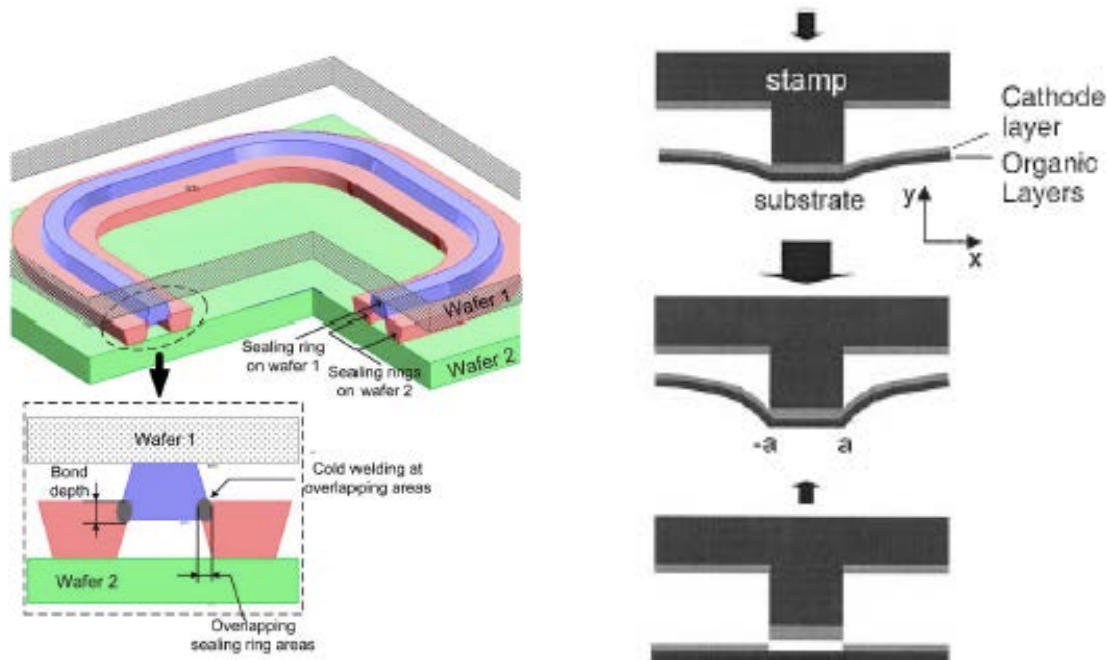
Cold welding cavity application (left), cold weld micro plotting (right)
